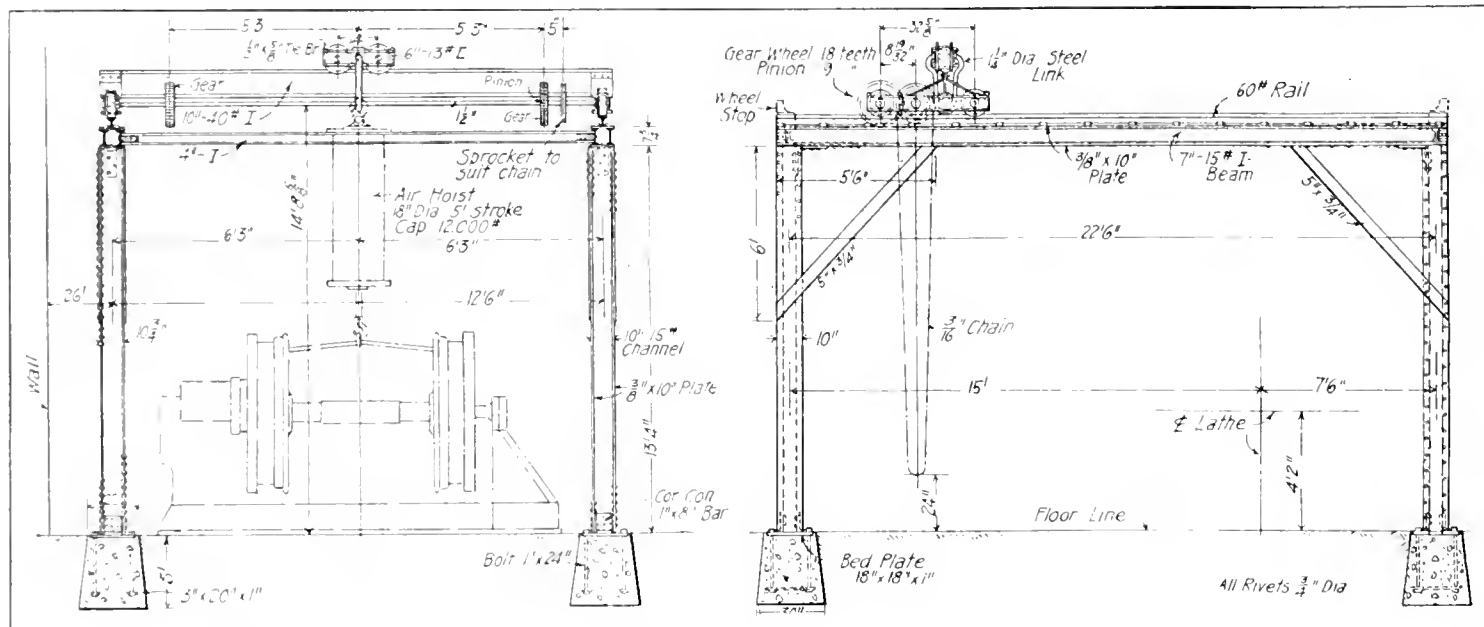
C.N.R. Locomotive House Machine Shop Crane for Wheel Lathe.
